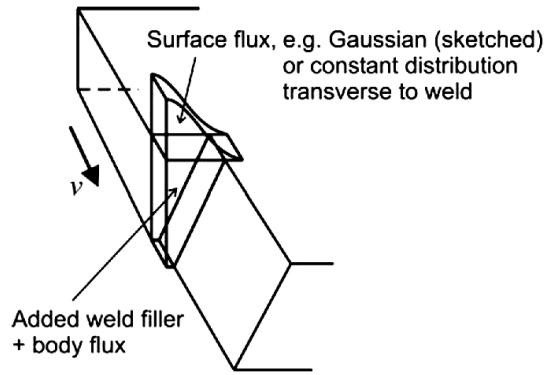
Principle of moving heat source for welding, modelled with addition of weld filler, a body flux and a surface flux shown on symmetric half of a butt weld.
